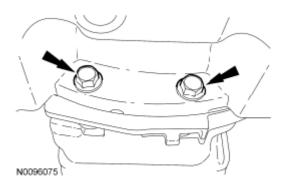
Locating Bellhousing-To-Oil Pan Bolts Courtesy of FORD MOTOR CO.
